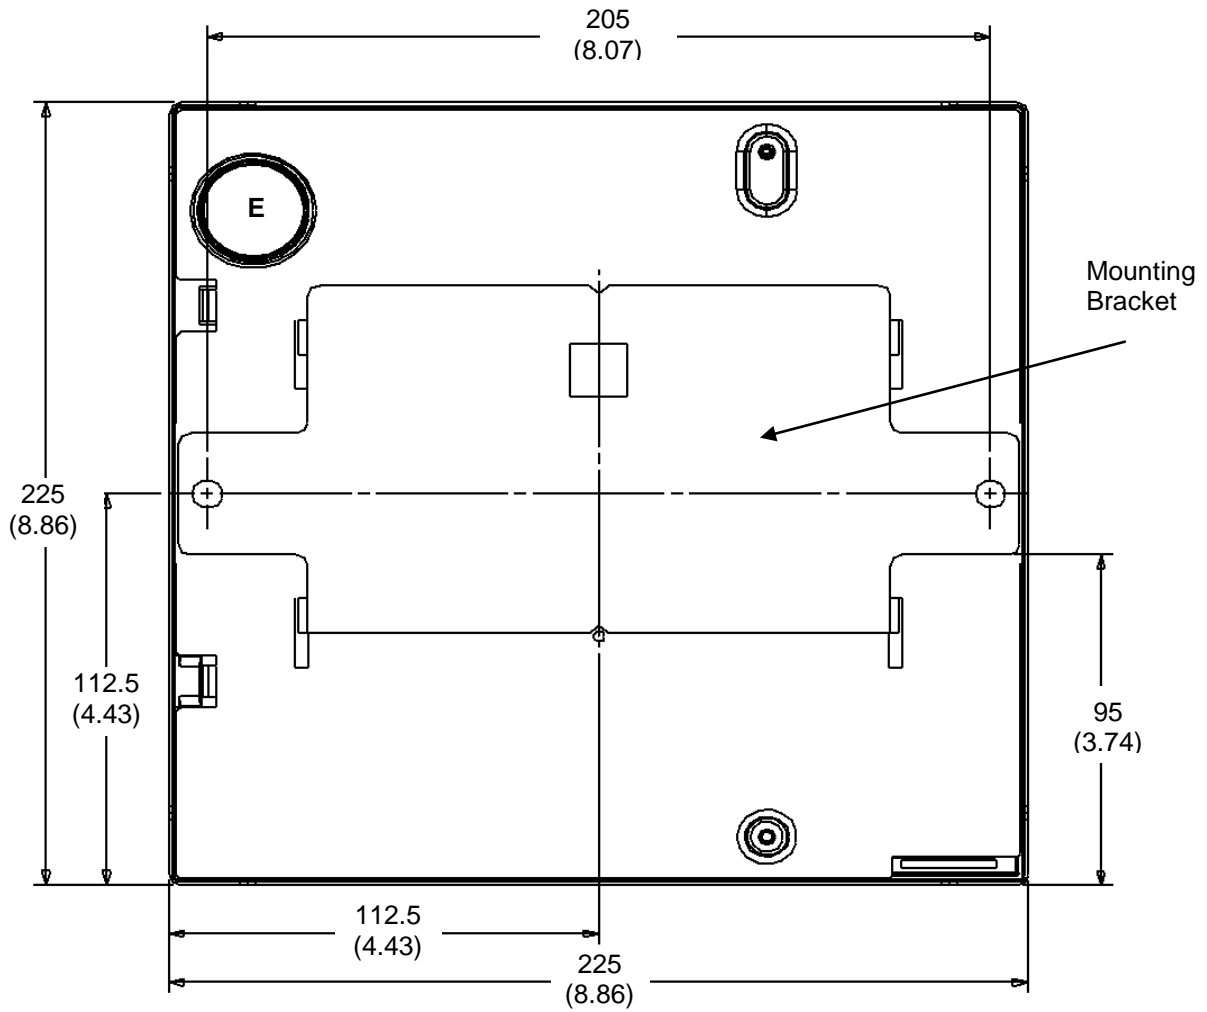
Dimensions in mm (inches) of VLC with mounting Bracket (Rear View). E=Cable Entry Point on Rear of Enclosure
